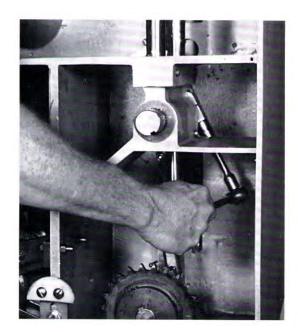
Using Socket to Loosen Upper Cup Crank Arm
